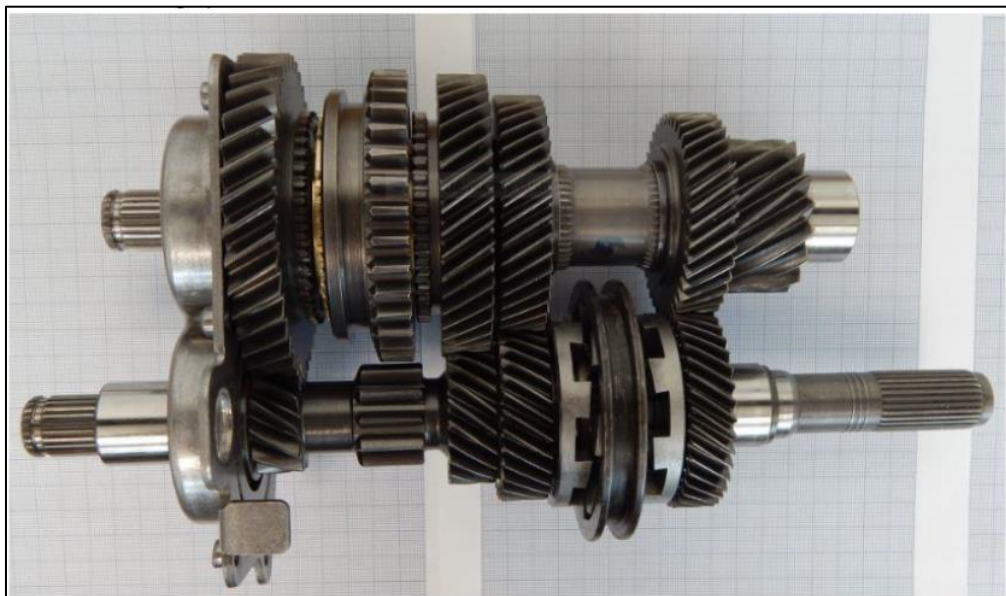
Input and output shaft of the passenger car gearbox with Maybach dog clutch between the 3rd and 4th speed [1, p. 4]
